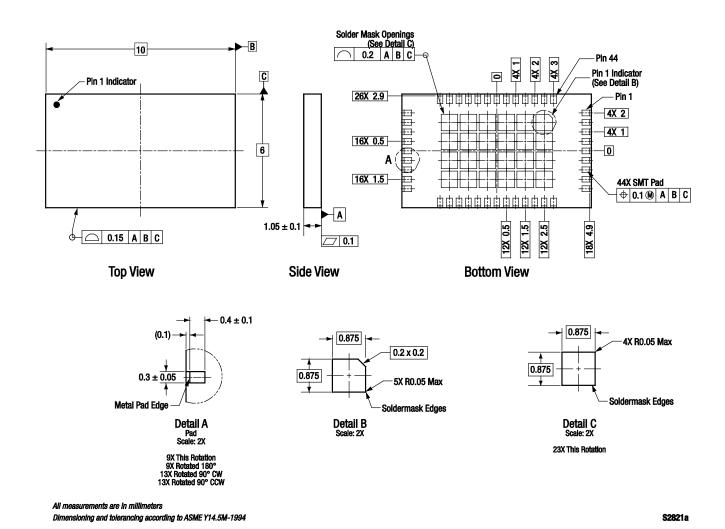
SKY73212-11 44-Pin MCM Package Dimensions
